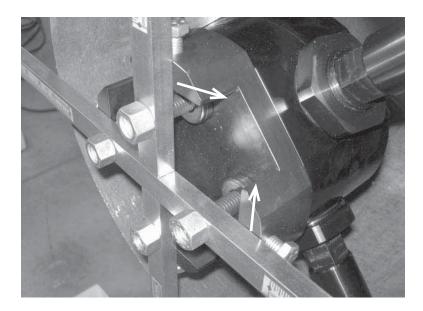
The alignment gauge must be flush against the face plate surface.
